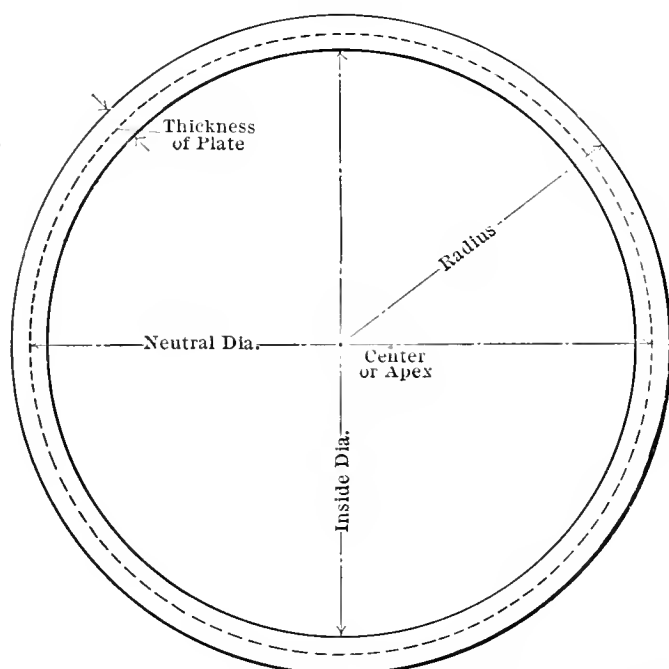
SECTION SHOWING DIMENSIONS OF SHELL PLATE.
